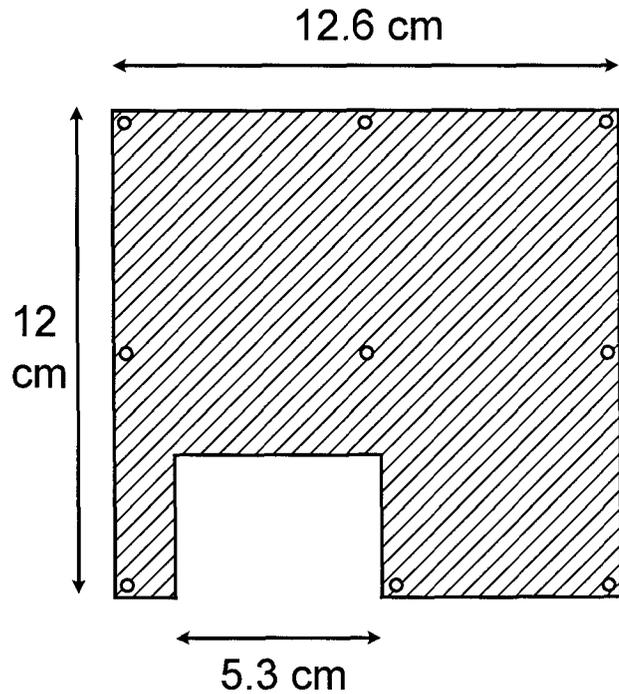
The Muses-CN top and bottom electronics board assembly footprint.
